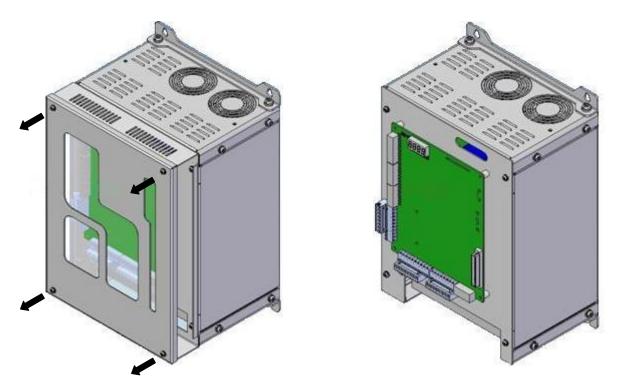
Remove terminal cover on close typeFigure 2.8Open type elevator controller
